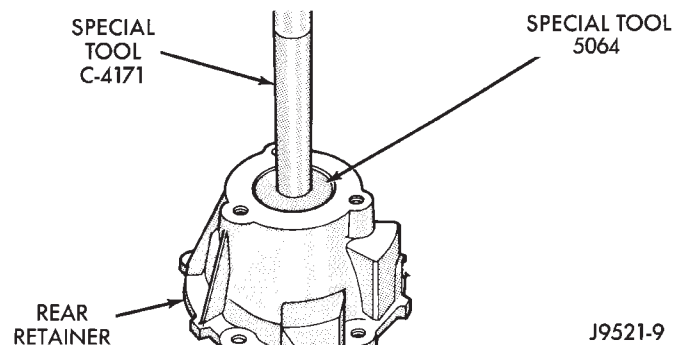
Installing Mainshaft Rear Bearing In Rear Retainer
